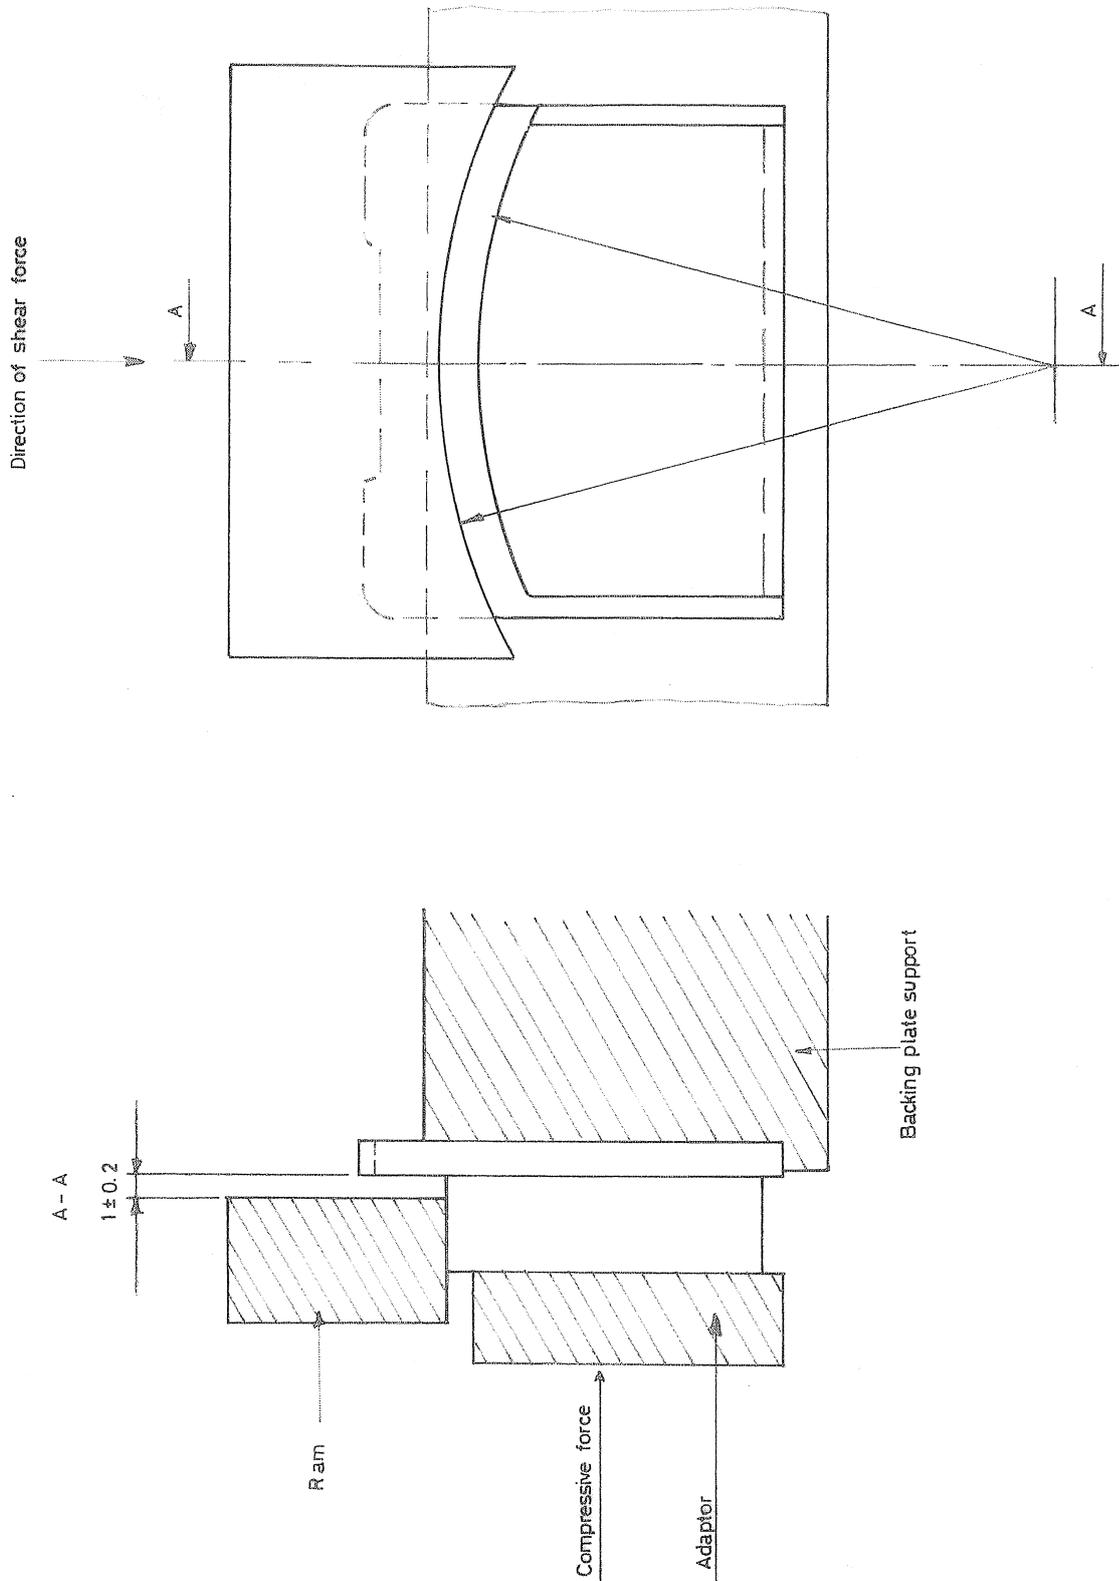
PRINCIPLES OF TEST FIXTURE – DISC BRAKE PAD
